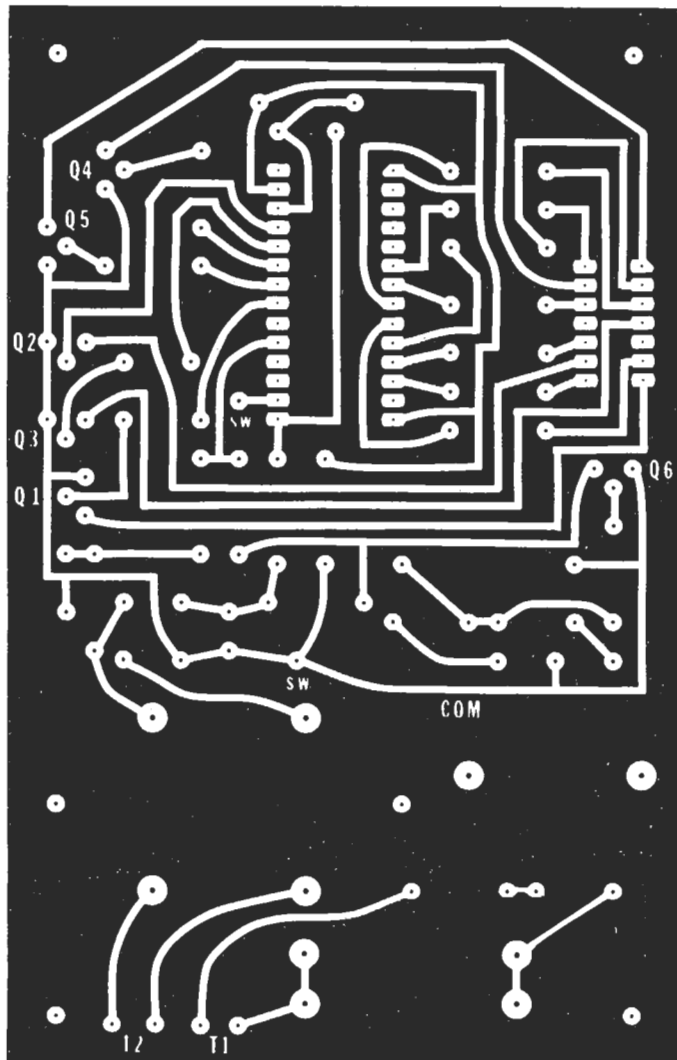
Exact-size foil pattern for a printed-circuit board for the project.
